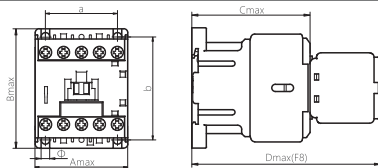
Outline and installation dimensions of NC8-06M~12M series AC contactors
